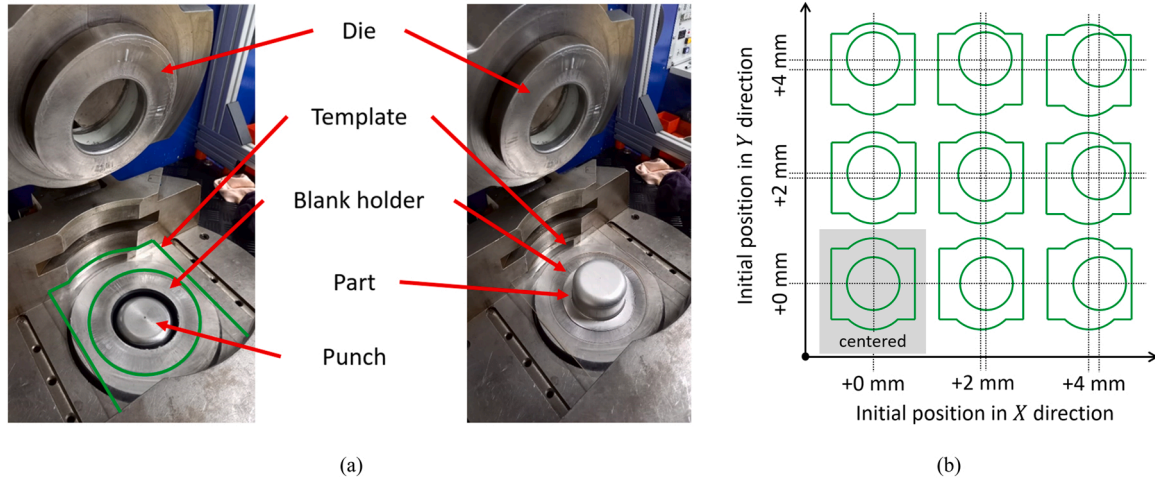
Press machine used for cup-drawing consisting of the three main tools punch, blank holder and die. On the right, the nine templates used for blank positioning are visualized. The templates contain a lower material thickness compared to the sheet and thus can remain inserted throughout processing due to the increase of the material thickness of the sheet in the flange area. Note that the movement of the initial position in (b) is exaggerated for illustrative purposes.
